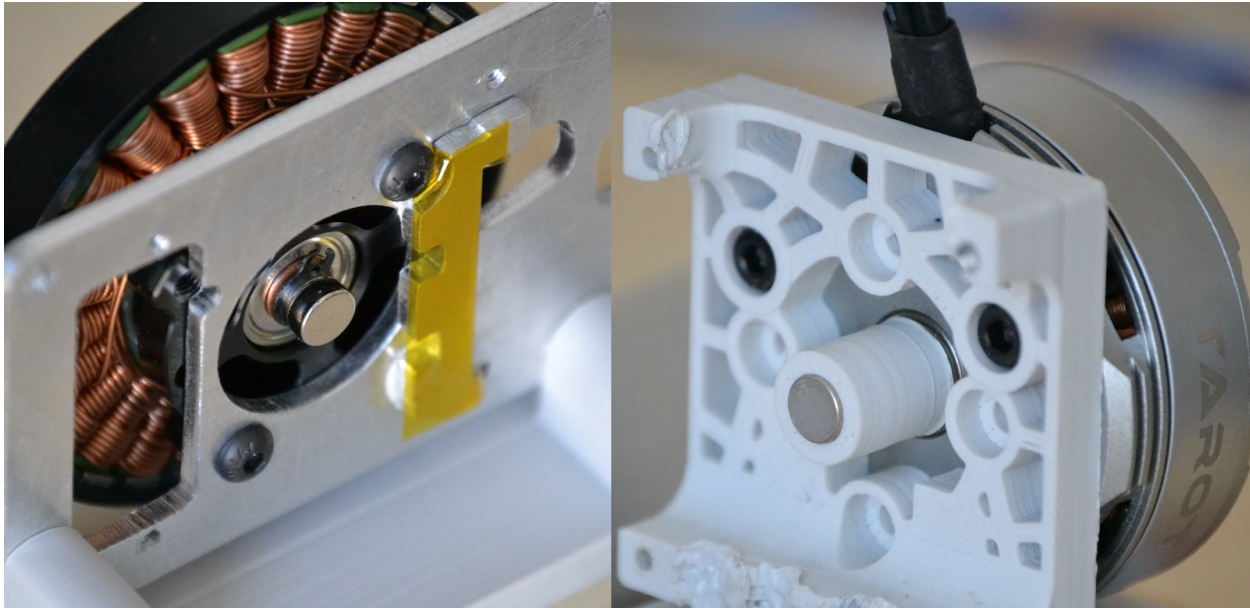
Left: Magnet mount directly on shaft. Right: Magnet mount using 3d-printed holder.
